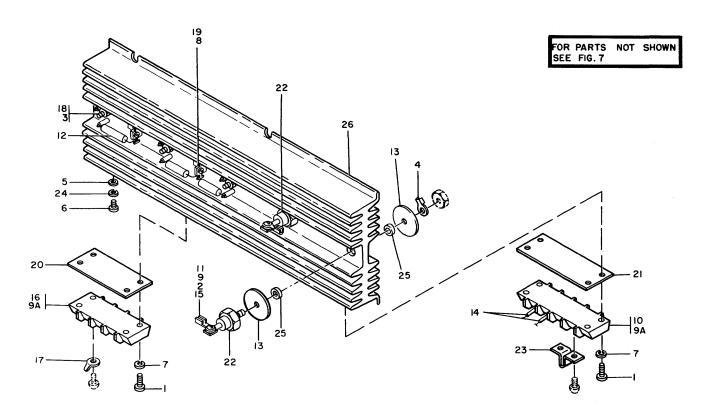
HEATSINK ASSEMBLY. SEE LIST 9.
